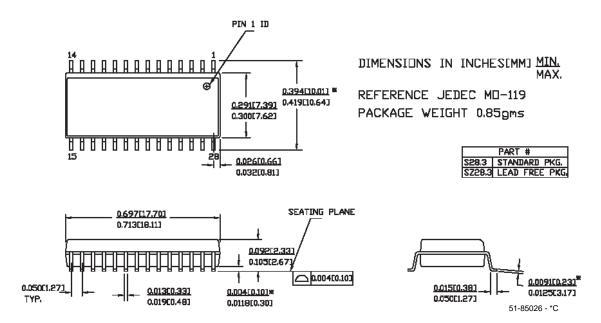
28-Lead (300-Mil) Molded SOIC
